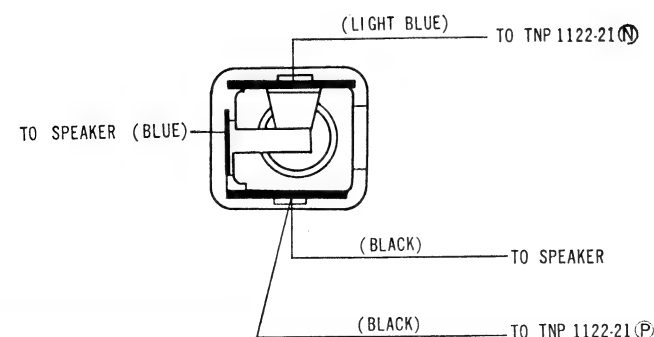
EARPHONE SOCKET (REAR VIEW)
